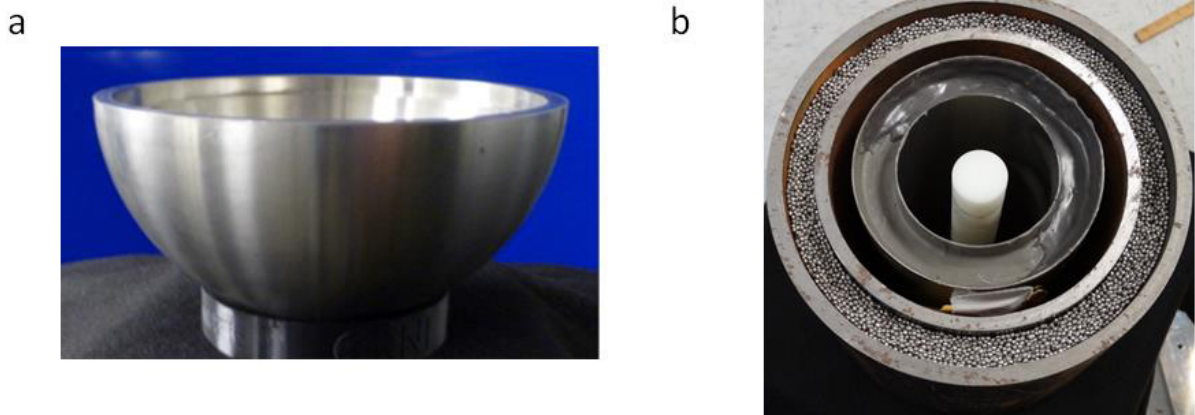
(a) spherical steel shell; (b) composite assembly.
